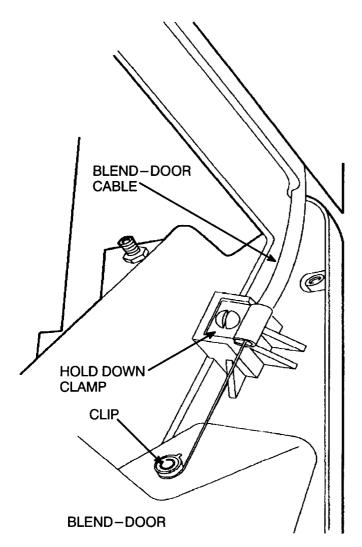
Connection of HOT-COLD Cable to Cab Blend-Door Assembly
